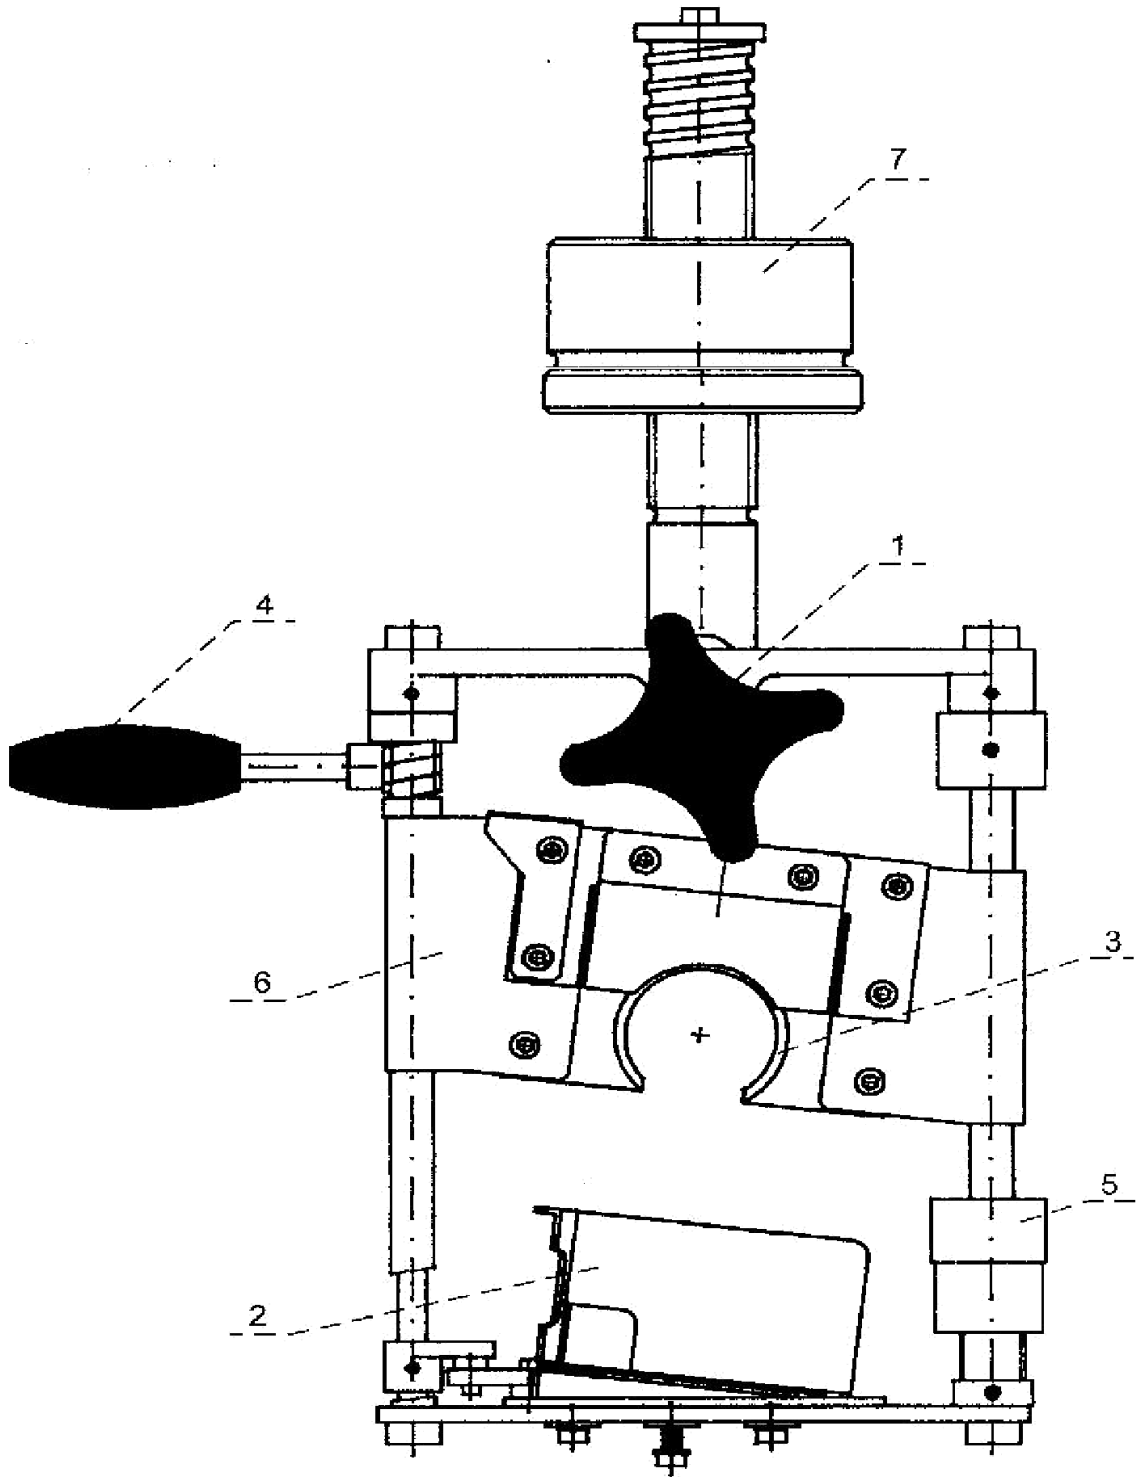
ARM OF THE CENTRIFUGAL CASTING MECHANISM PANEL
